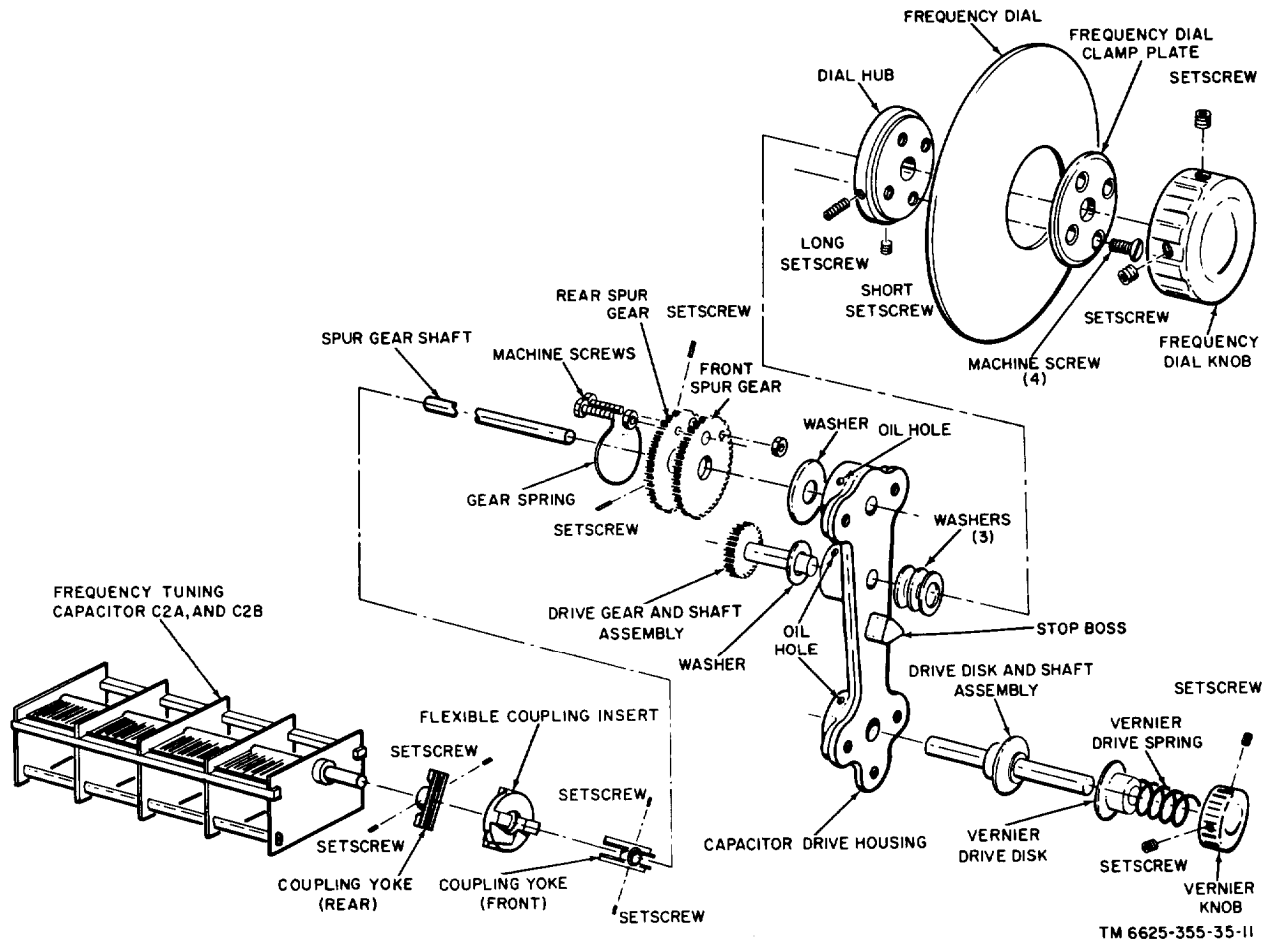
Capacitor drive assembly, exploded view, TS-421A/U.
